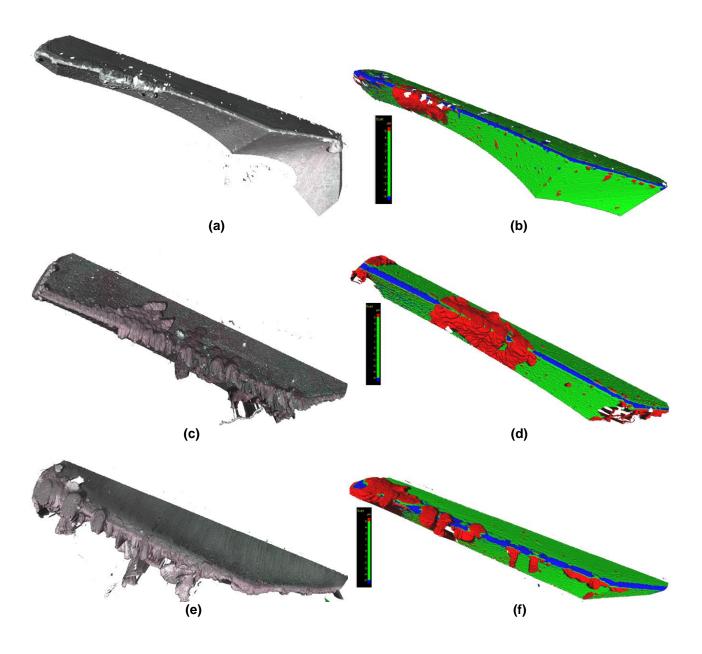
Evolution of the cutting tool: EFFIPRO Tool (a-b), Standard tool(c-d) and other commercial tool (e-fol) for 27 holes drilled in CFRP/TA6V under dry conditions: (a) one cutting edge of the EFFIPRO tool, (b) Superimposition of the new and worn cutting edge of EFFIPRO tool, (c) one cutting edge of the Standard tool, (d) Superimposition of the new and worn cutting edge of Standard tool, (e) one cutting edge of the other commercial tool, (f) Superimposition of the new and worn cutting edge of other commercial tool.
